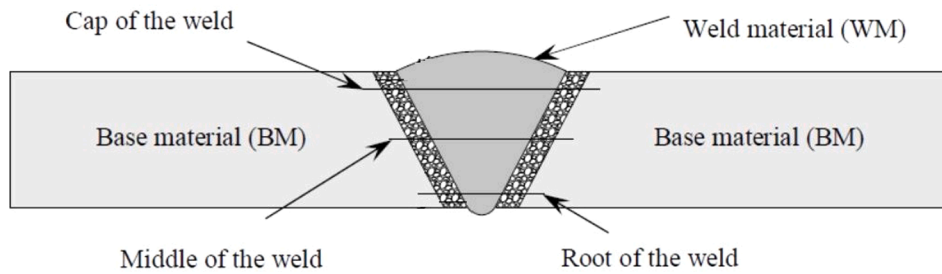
Hardness measurement locations on a weld cross-section [19].
